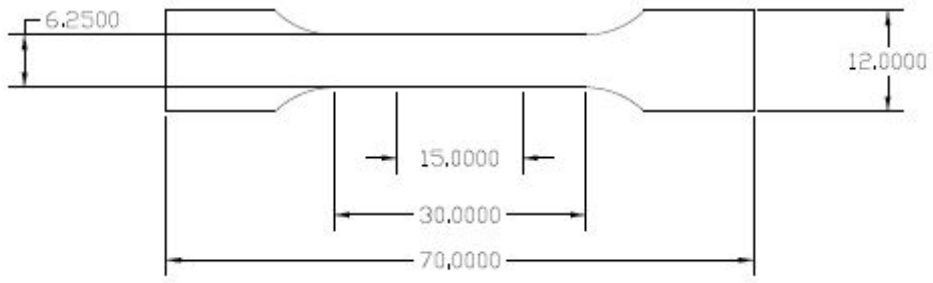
3. Schematic illustration of the samples extracted from the dissimilar metal welds.
